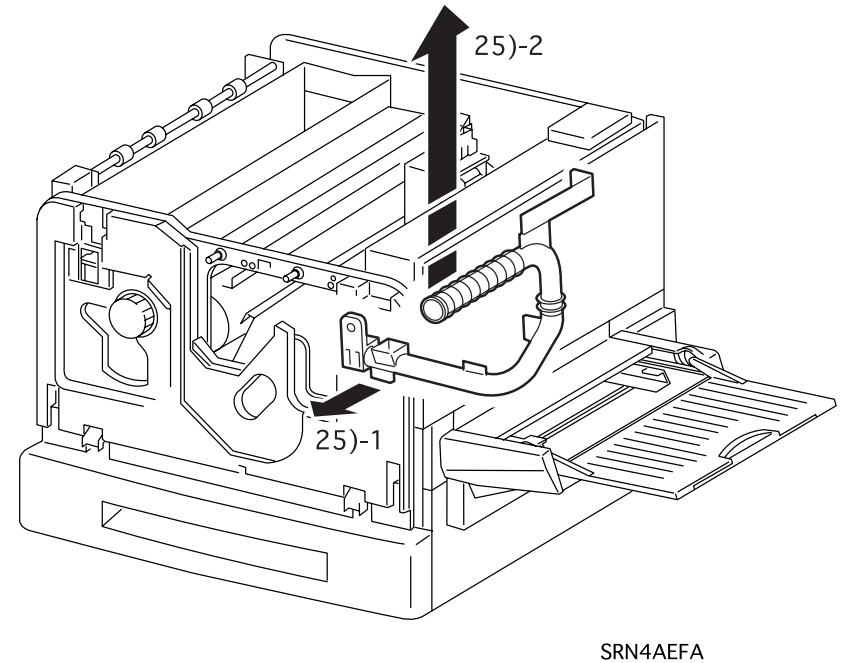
AUGER HIGH ASSEMBLY Removal (3/3)
